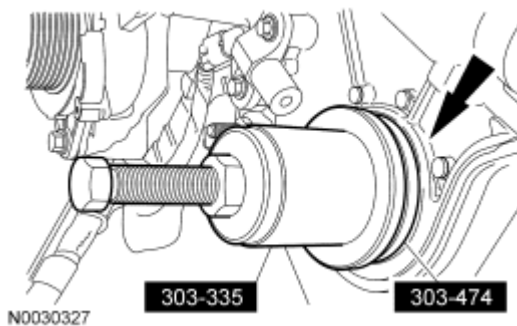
Installing Crankshaft Front Seal Using Special Tools (303--335) And (303--474)
